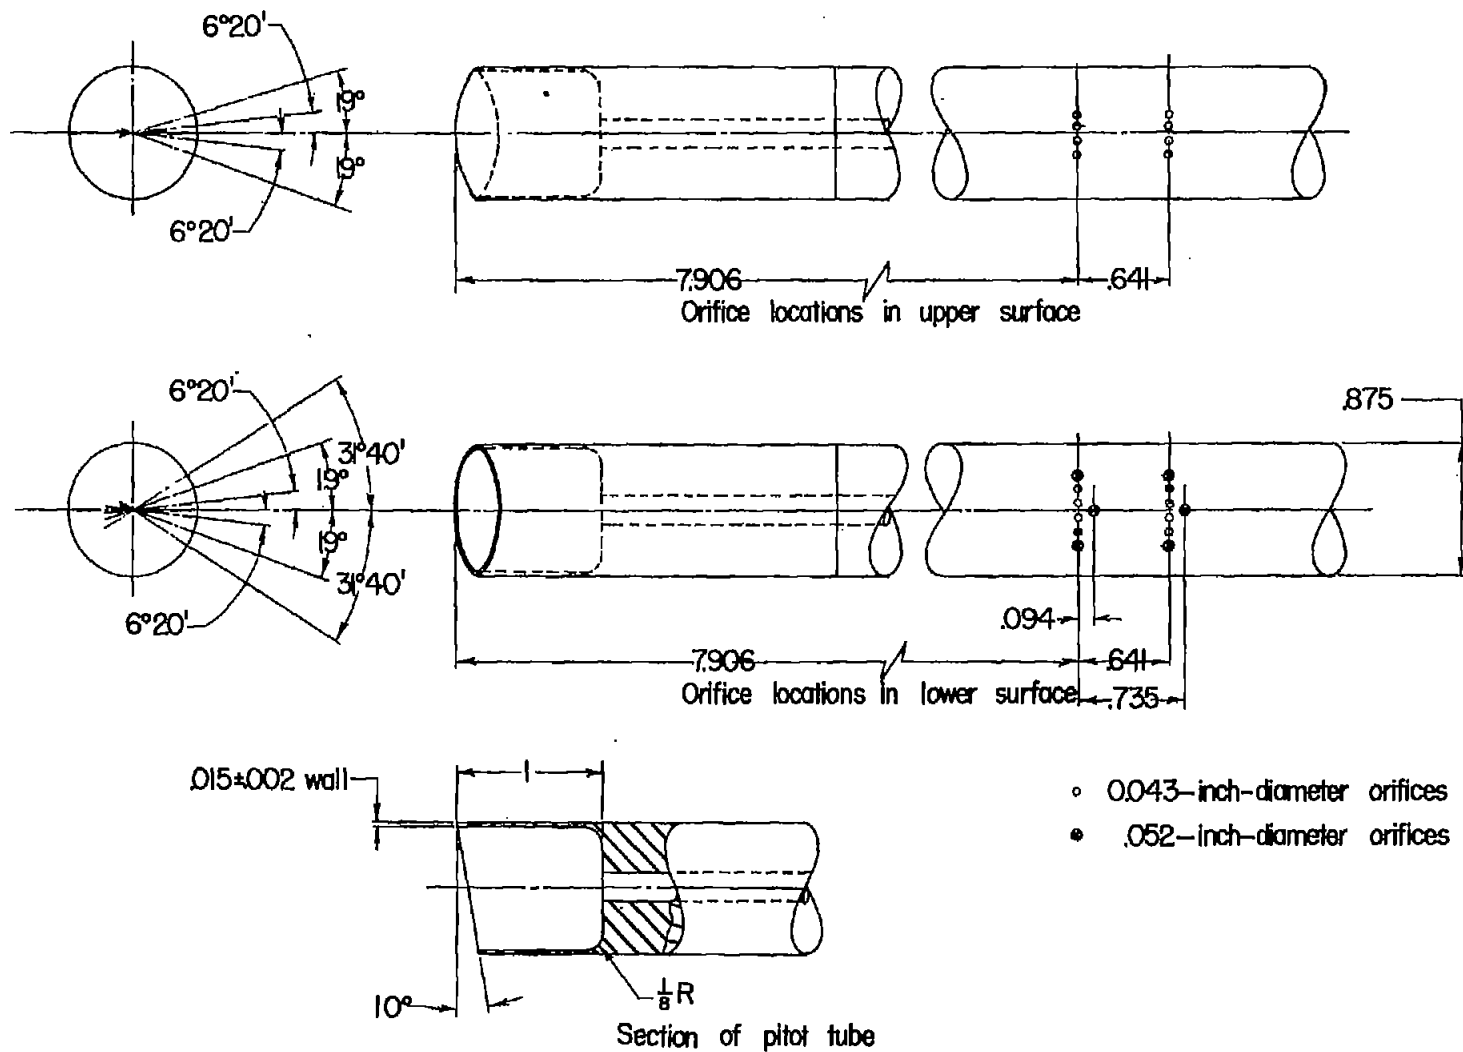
Details of pitot-static tube. All linear dimensions are in inches.
